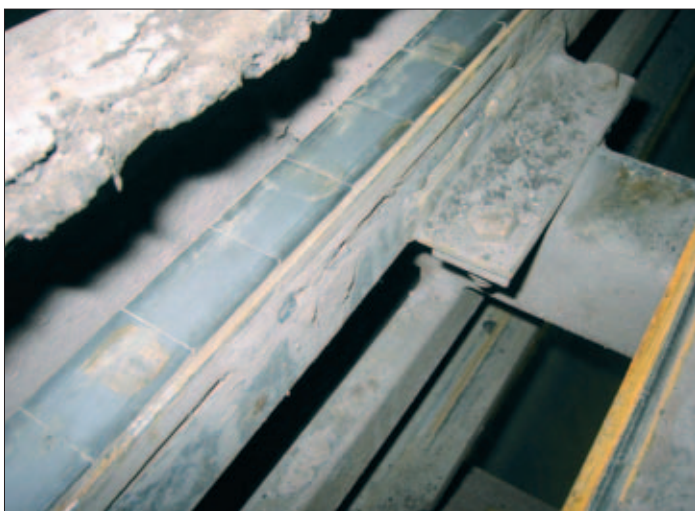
Tungsten-carbide edges for roller runway of conveyor belts
